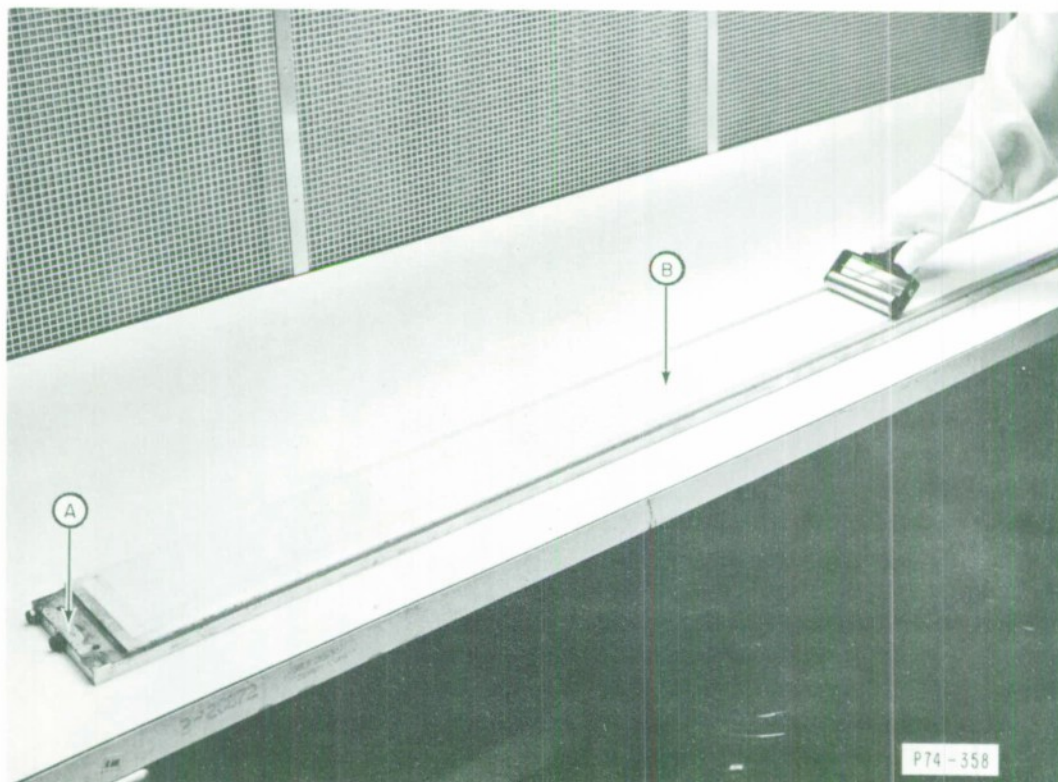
Copper foil on vacuum chuck being rolled to flatten out bumps and force out air bubbles. (a) Vacuum chuck, (b) Copper foil.
